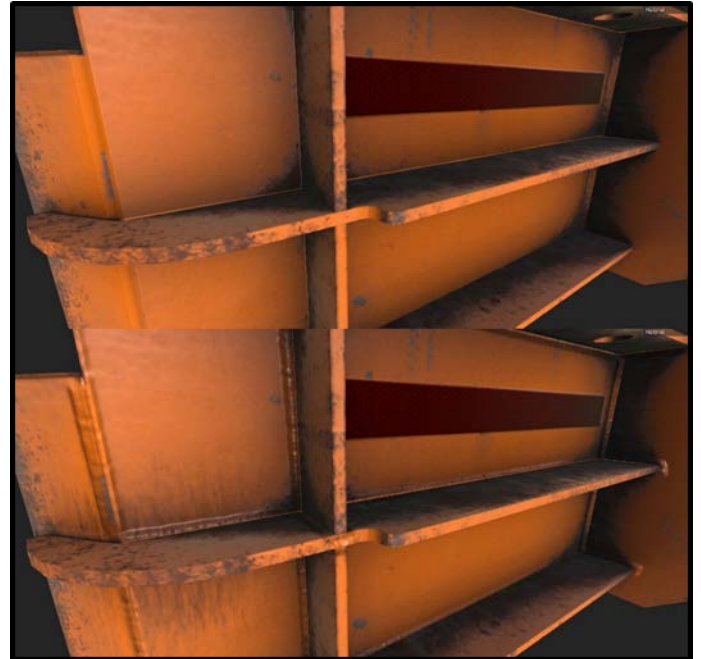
Detail view of heavy equipment showing seams between plates with and without welds.
